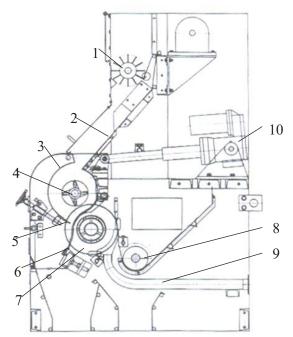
Scheme of the linter MR160-11C: 1 - feed roller, 2 - patch, 3 - working chamber, 4 - agitator, 5 - seed comb, 6 - grate, 7 - saw cylinder, 8 - weed auger, 9 - linter channel, 10 - mechanism for raising and lowering the chamber
